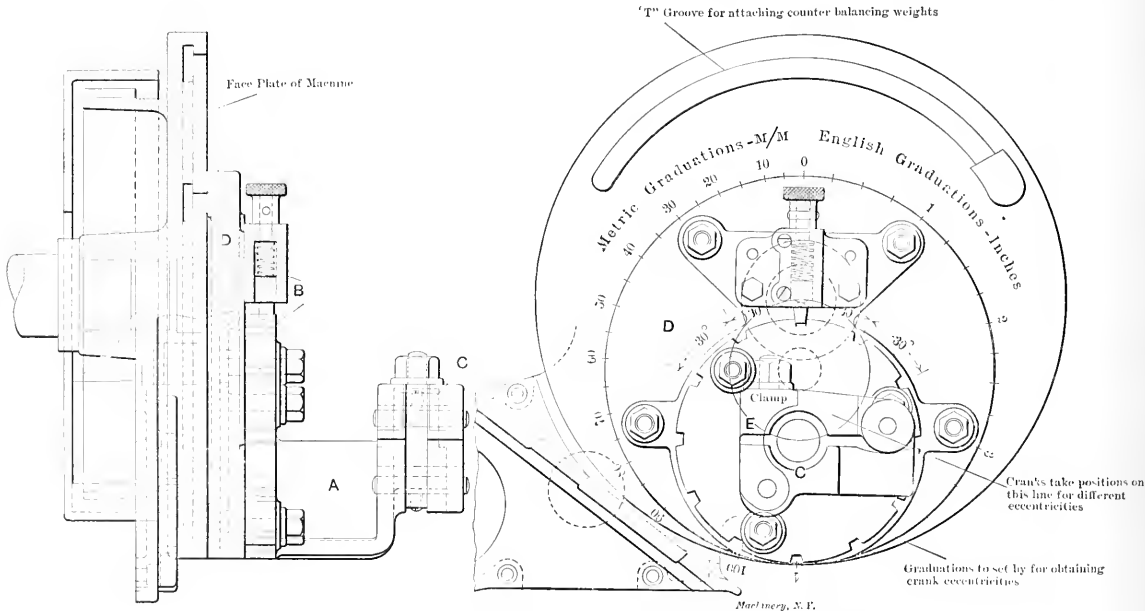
Special Chuck for Holding Crankshafts having up to four inches Eccentricity.
